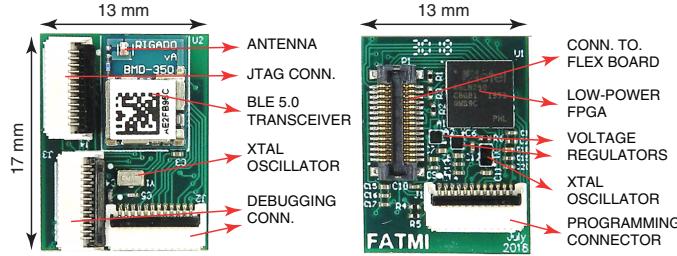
Top and bottom views of the presented backend mini-PCB with major components annotated.
